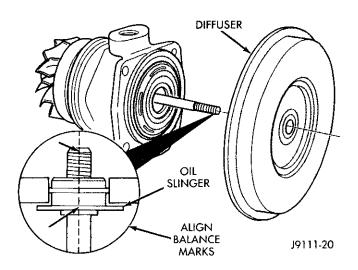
Align Balance Marks-Shaft and Oil Slinger
